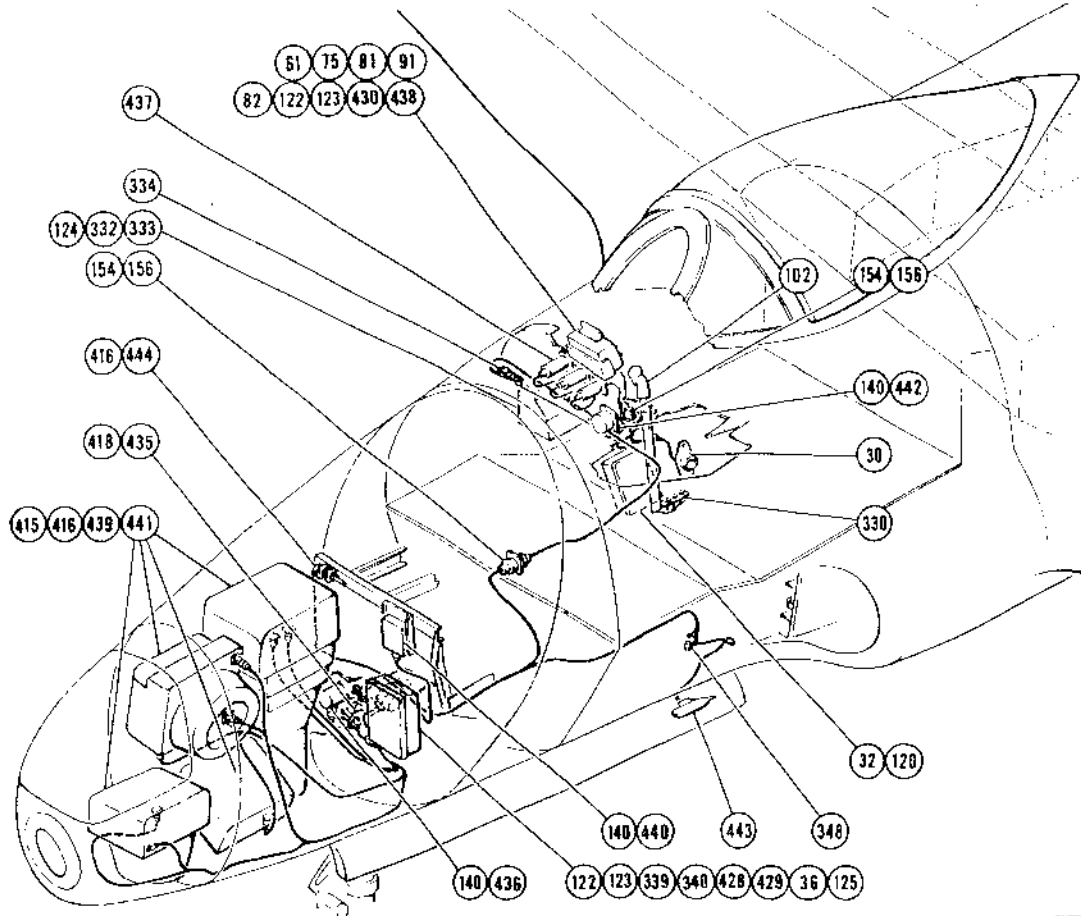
(Sheet 1 of 2 Sheets) — Camera Equipment Wiring Diagram — FP-80A-5 Airplanes
